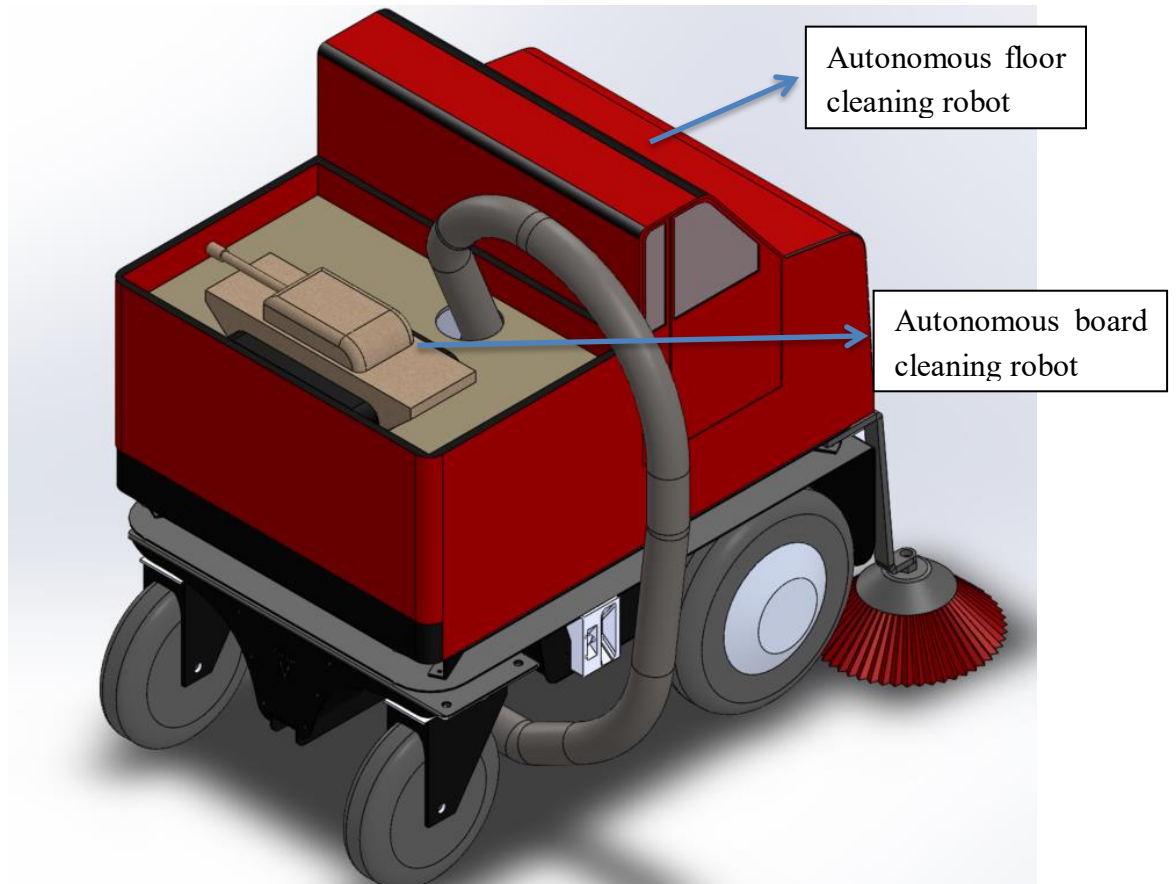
Image to show the idea of collaboration of robotic vacuum cleaner with robotic board cleaner.
